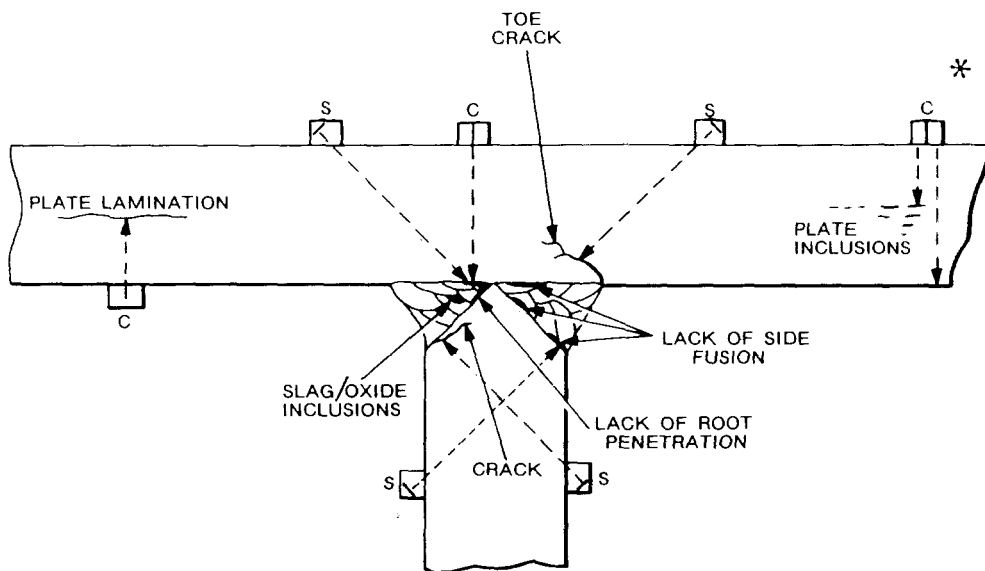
ULTRASONIC CRACK DETECTION ON A FILLET WELD
